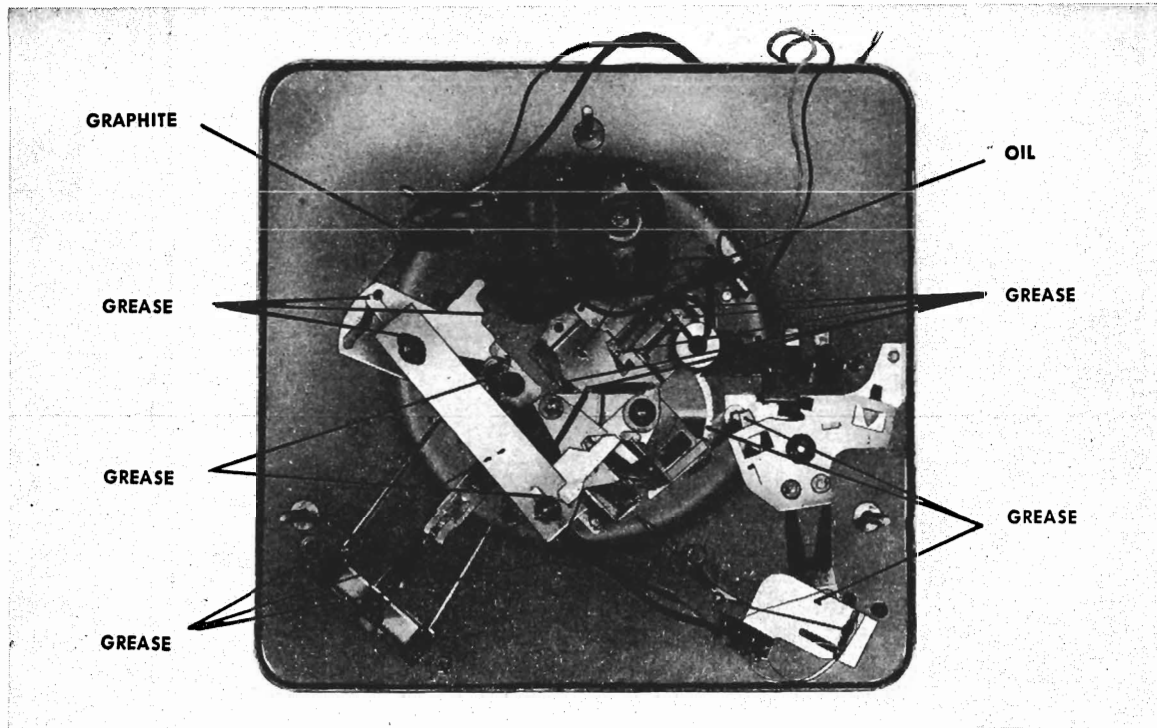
BOTTOM VIEW, SHOWING LUBRICATION POINTS
